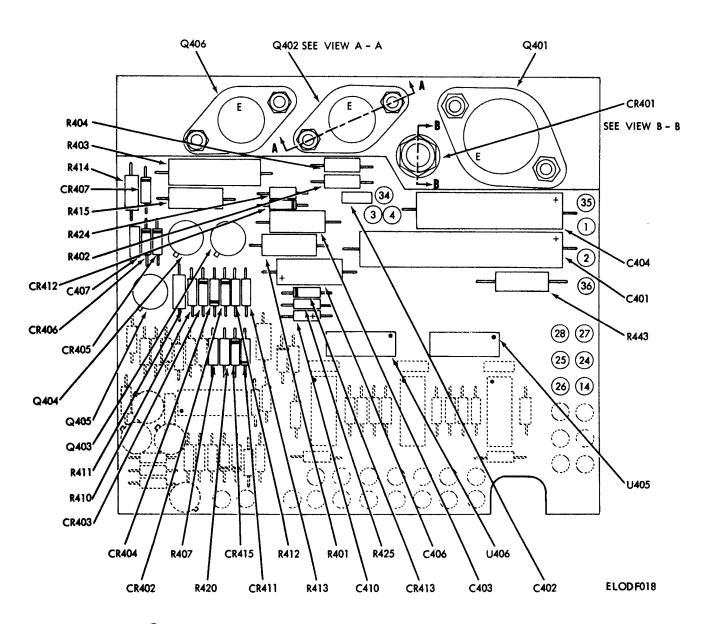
\bigodot Dc voltage regulator and data drive printed circuit board assembly (A4) (sheet 1 of 2).
